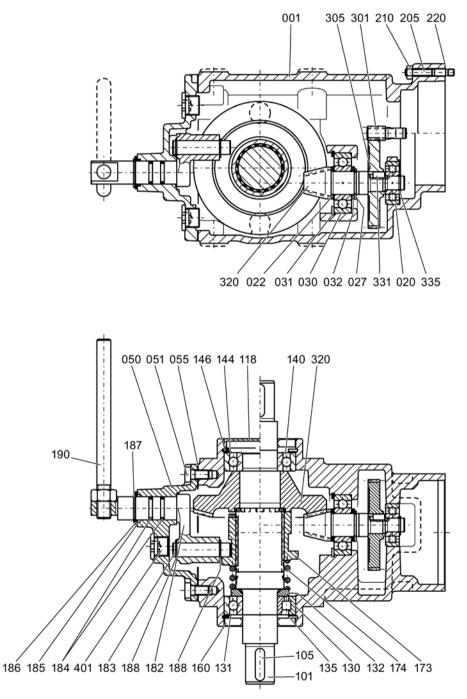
Bevel helical gearboxes BHF38, BHB38
